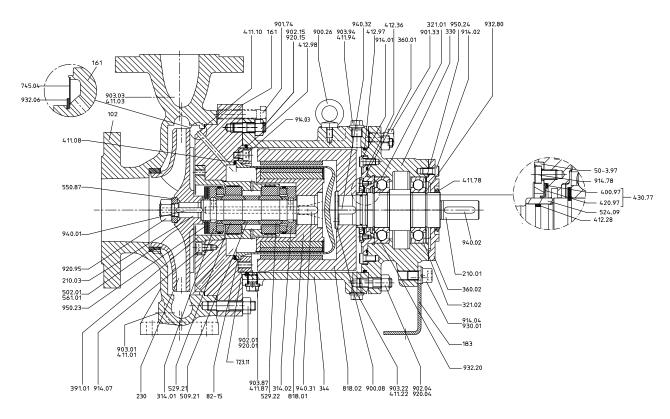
General assembly drawing of Magnochem with ceramic containment shroud and leakage barrier, bearing bracket P02 MK110
